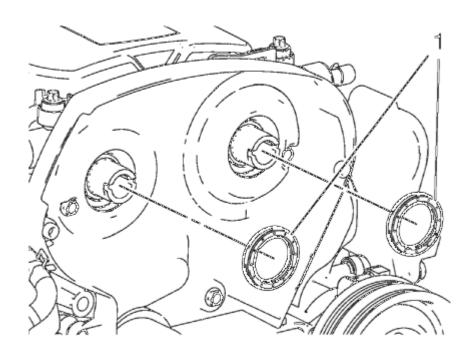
Camshaft Front Oil Seals And Tool Courtesy of GENERAL MOTORS COMPANY
